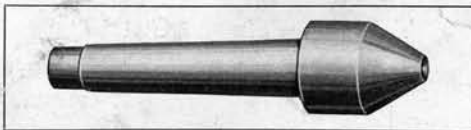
Female Center. Head is hardened, and is ground to 60° external angle. The hole, $\frac{3}{16}$ " maximum diameter, is 60° included angle
